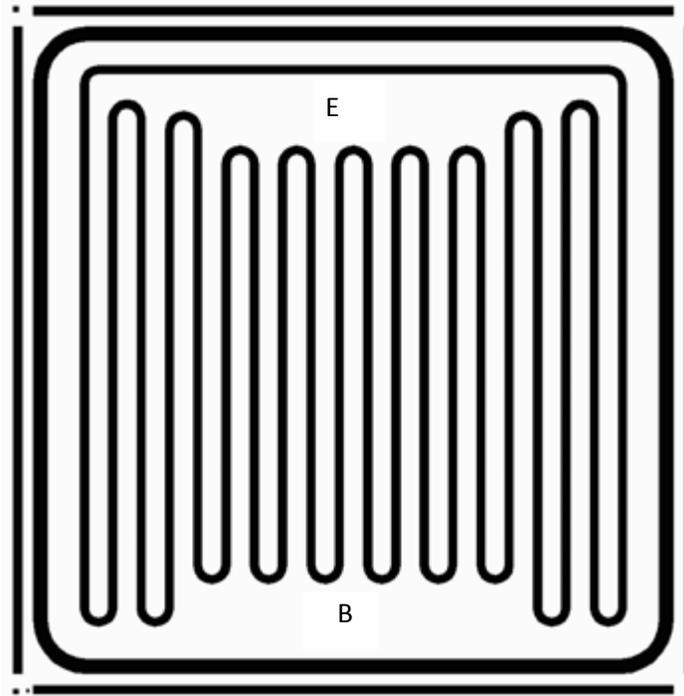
Physical dimensions JANHC and JANKC A-version die dimensions.
